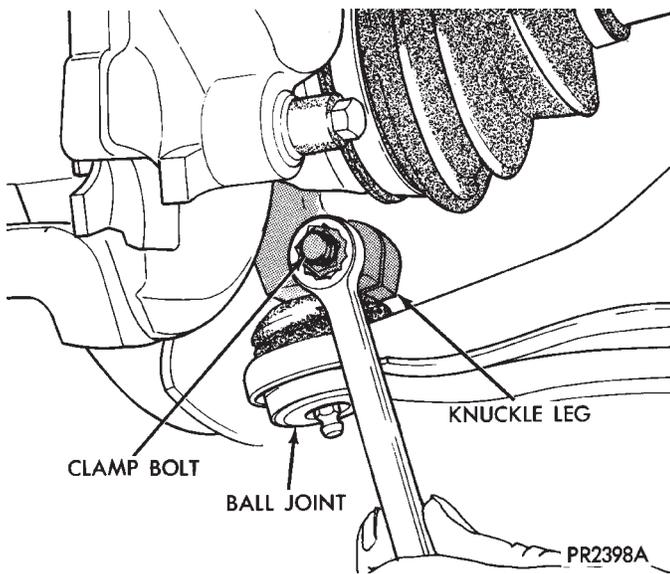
Remove Ball Joint to Steering Knuckle Clamp Bolt
